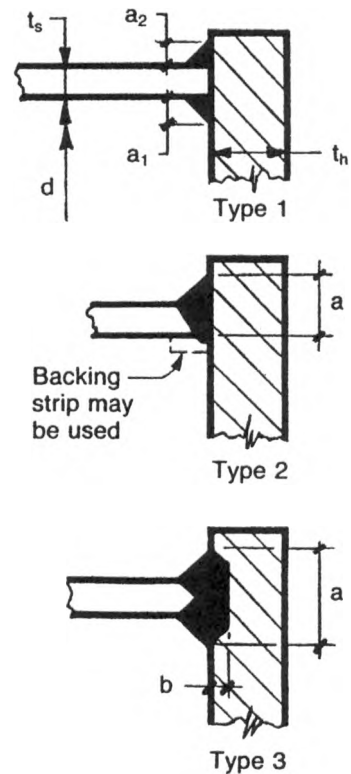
Case 9: Welded flat heads [1, Figure UG-34(h), Figure UW-13.2(g) (e-1)(f)].
